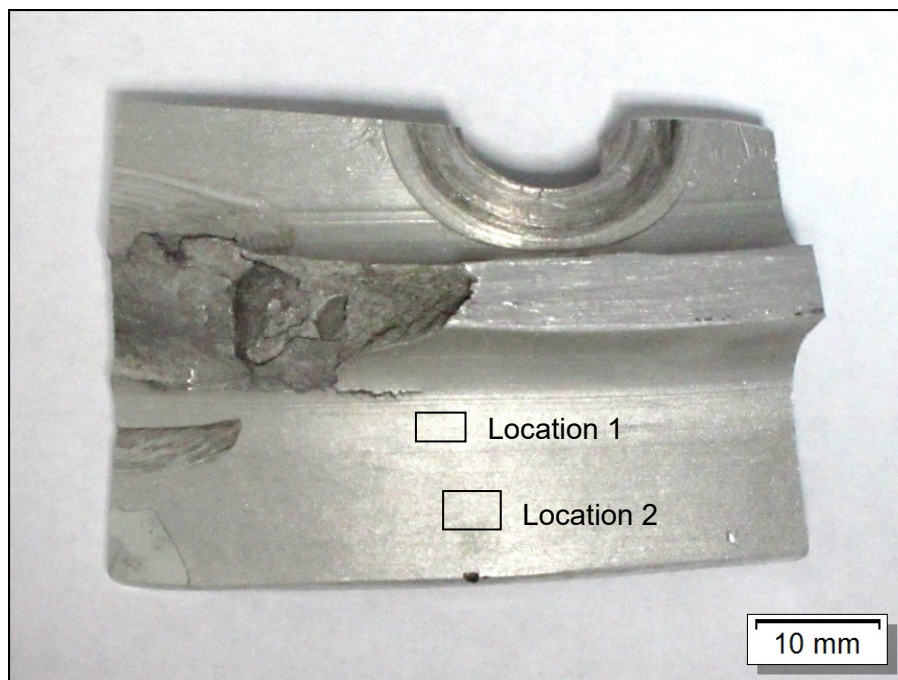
Segment of the centre engine mount – locations of the examined surfaces.
